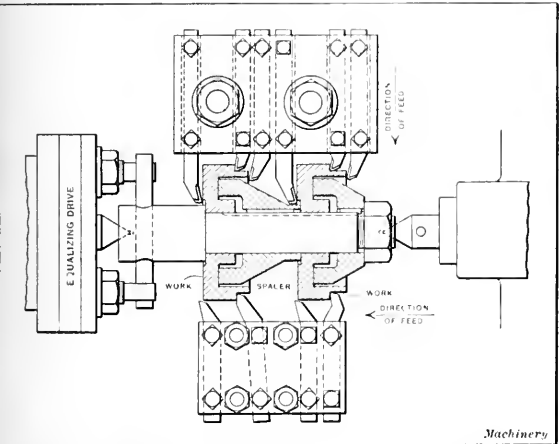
Example of Two Pieces clamped on Arbor, illustrating Use of Spacer
